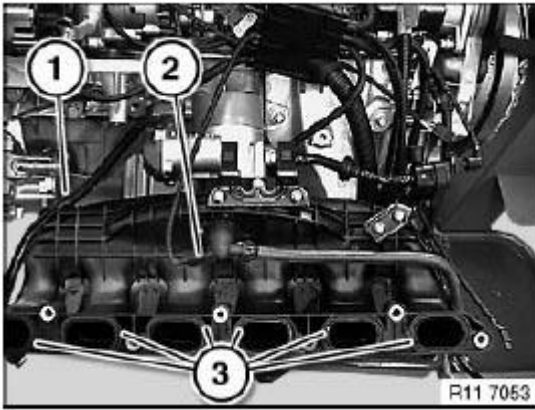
Identifying Cable Tie, Plug Connection And Seals
